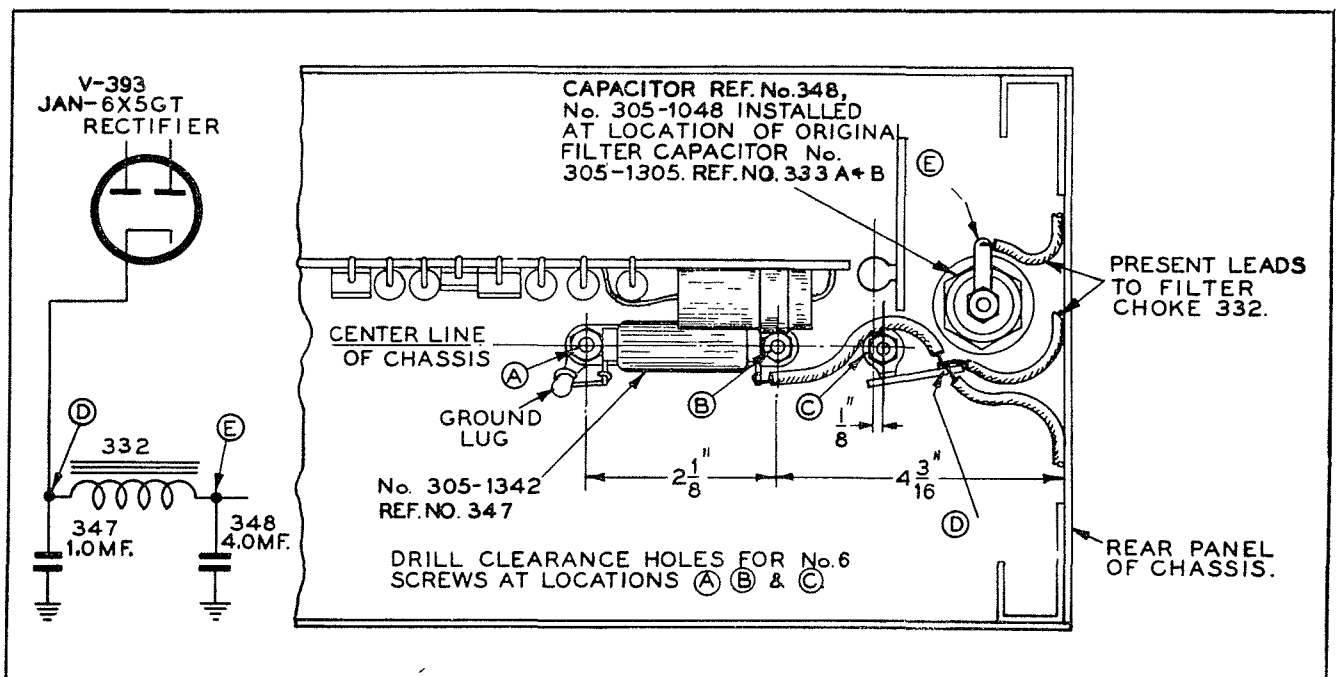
Indicator BC-929-(*)—Mounting of Capacitors 347 and 348
